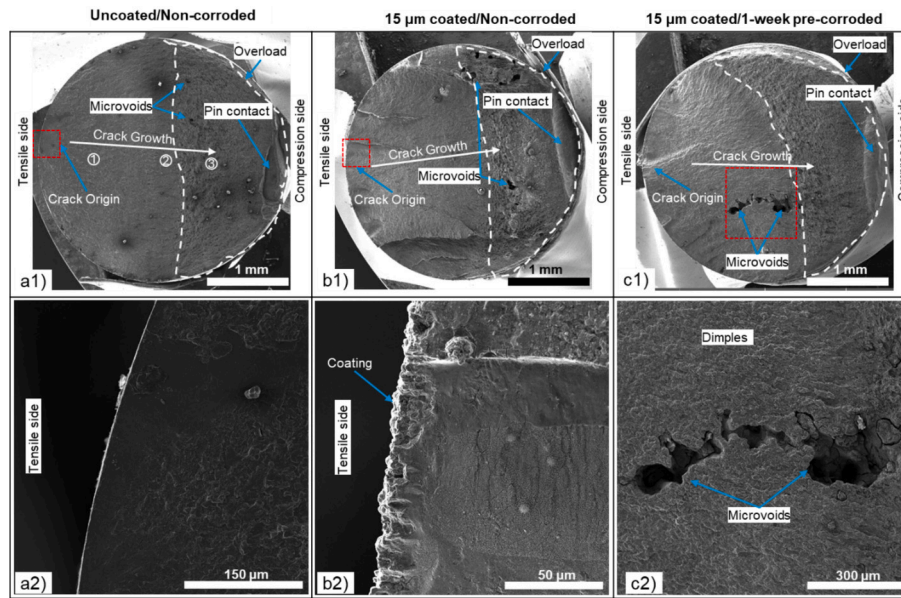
Fatigue fracture surfaces and initiation morphologies of AZ31 rods tested 3 PB. Top row (a1–c1): whole-section views with the tensile side on the left and the loading-pin (compressive) side on the right; the neutral axis is indicated by a dashed line and the peripheral final overload (shear-lip) rim is outlined. (a1) Uncoated, non-corroded, (b1) 15 μm ECO, non-corroded, and (c1) 15 μm ECO, 1-week pre-corroded in HBSS. Bottom row (a2–c2): corresponding high-magnification details (a2) tensile-edge origin area in uncoated non-corroded, (b2) crack initiation of 15 μm coating and non-corroded, and (c2) microvoid coalescence representative of the final-overload region. 1–2–3 in a1 refer to the regions investigated at high resolution in Fig. S 2.
